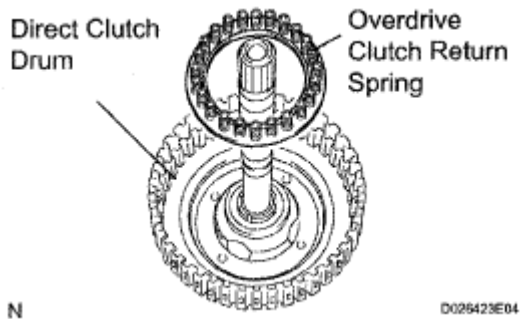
Identifying Overdrive Clutch Return Spring And Direct Clutch Drum
